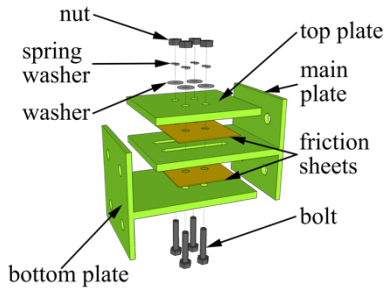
Assembling view of the dissipater (two-slot dissipater for example)
